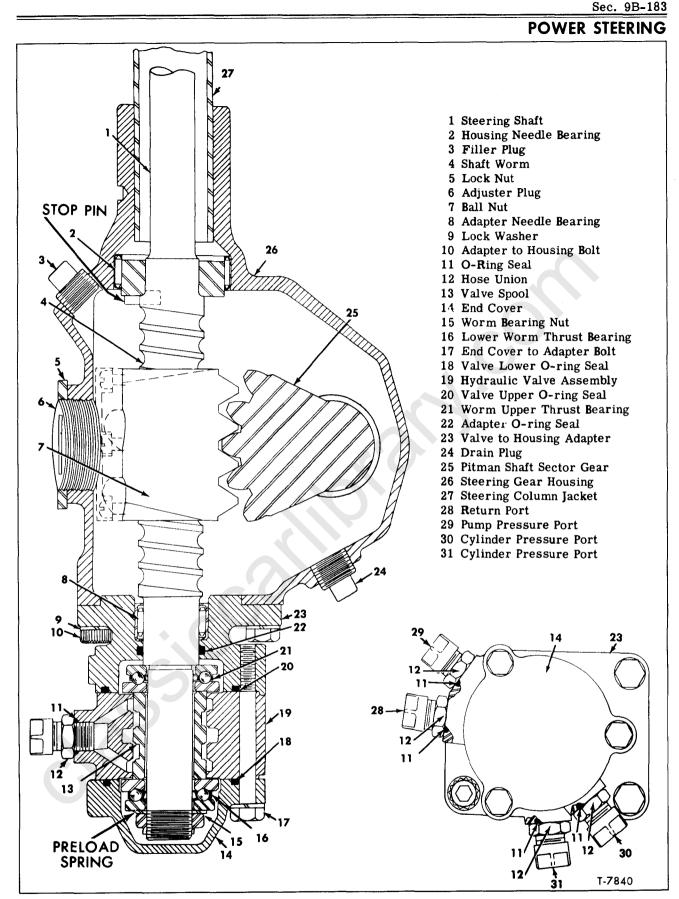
Power Steering Gear and Control Valve Type 568-DV (Used on RM 80 Model)
